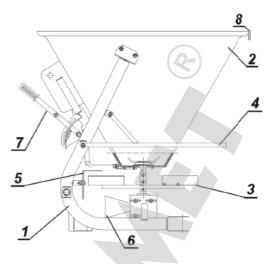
Fertilizer spreader with a metal tank N020/5 (JM 650 kg): 1-frame, 2-metal tank, 3-spreading disc, 4-deflecting bar, 5-front shield of the spreading disc, 6-shield of power input connection, 7-levers of seeding dose regulation, 8-handle to fix the bracket for light and warning devices and a triangular sign for low-speed vehicles
